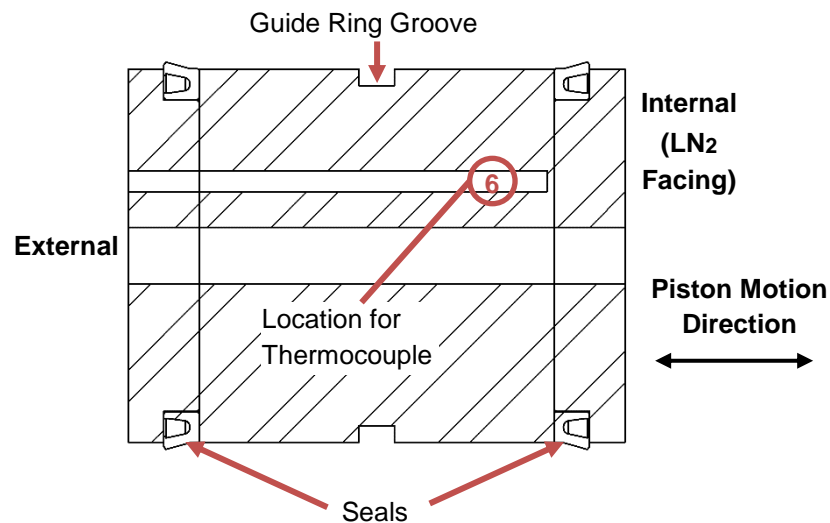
Section View of Stainless Steel Piston with a Thermocouple – Sensor 6
